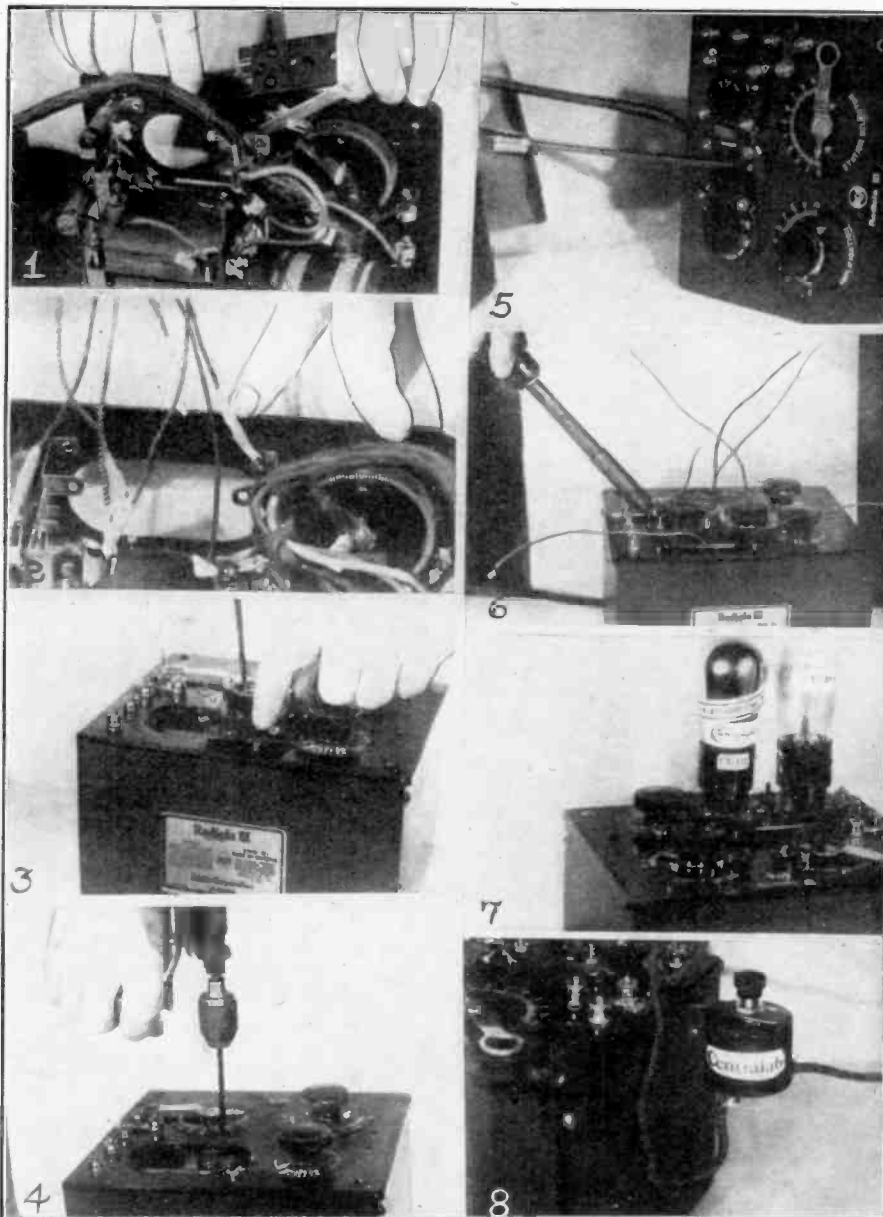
The little Bakelite socket strip, which is mounted directly under the cut out section, is then removed. Now procure some adhesive tape and cut up into eight pieces. Mark each piece according to the socket post markings. Then, before disconnecting the wires from the socket, place these markers on the wires. Also remove the metal strips holding the sockets, as well as the rubber bands, and discard. Solder eight pieces of bell wire to the eight flexible wires within the set. Tape these leads. Bring these leads up through the cutout portion, being sure that you can still see the markers.
